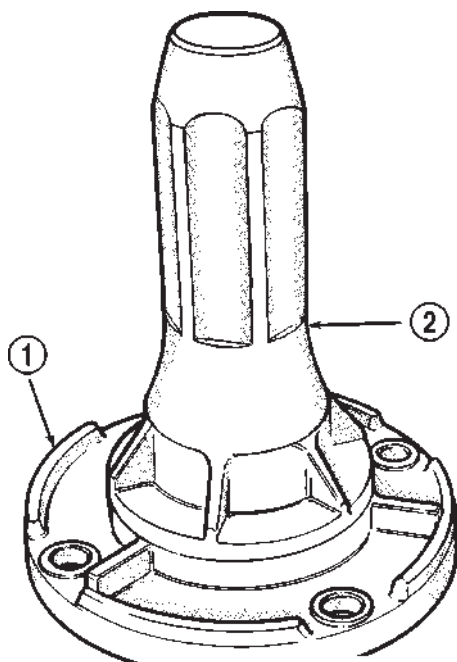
Checking Front Output Seal Installation Depth J9521-190
